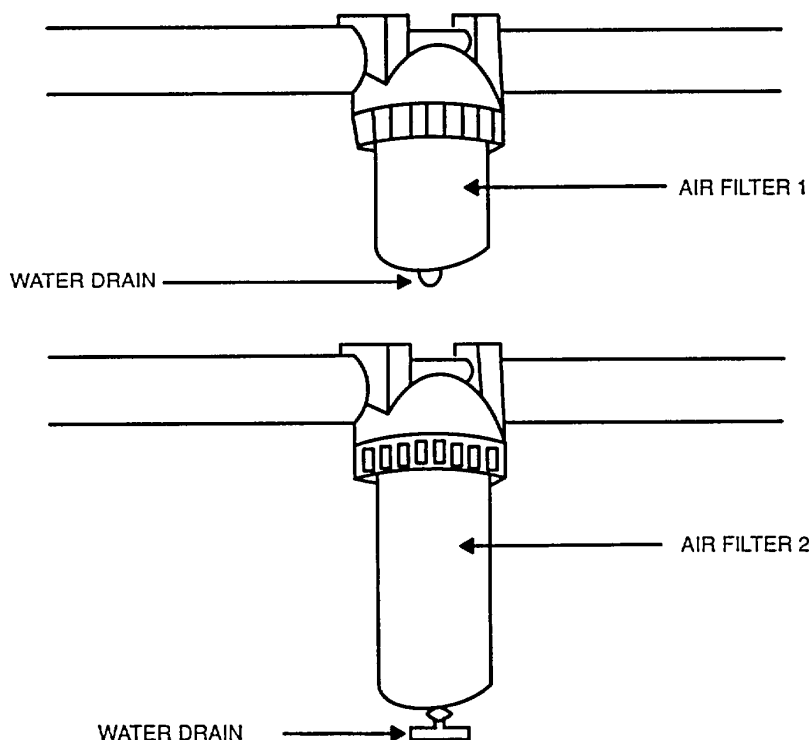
Exterior View of Air Filter 1 and Air Filter 2
